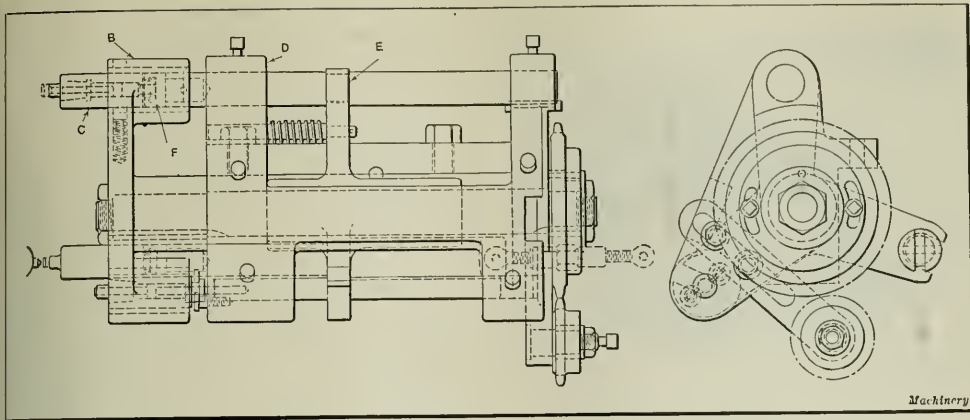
Attachment employed in Connection with the Saw Head shown in Fig. 1 for slotting the Heads of Screws
